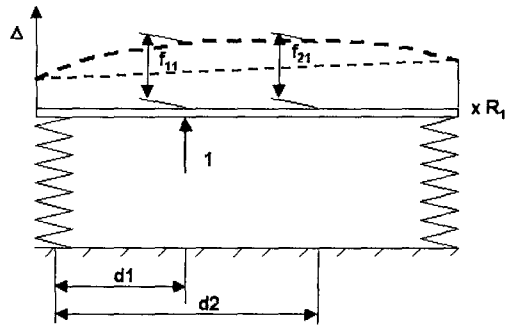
Deflection of workpiece by primary beam loaded with redundant R_1
